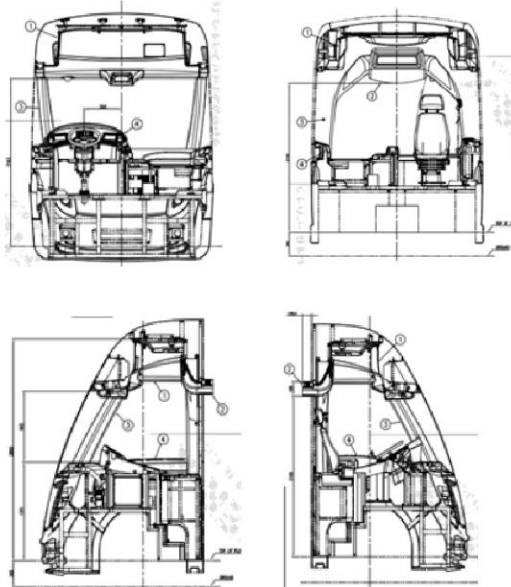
Two dimensional design of the front part of the Bimodal tram.
